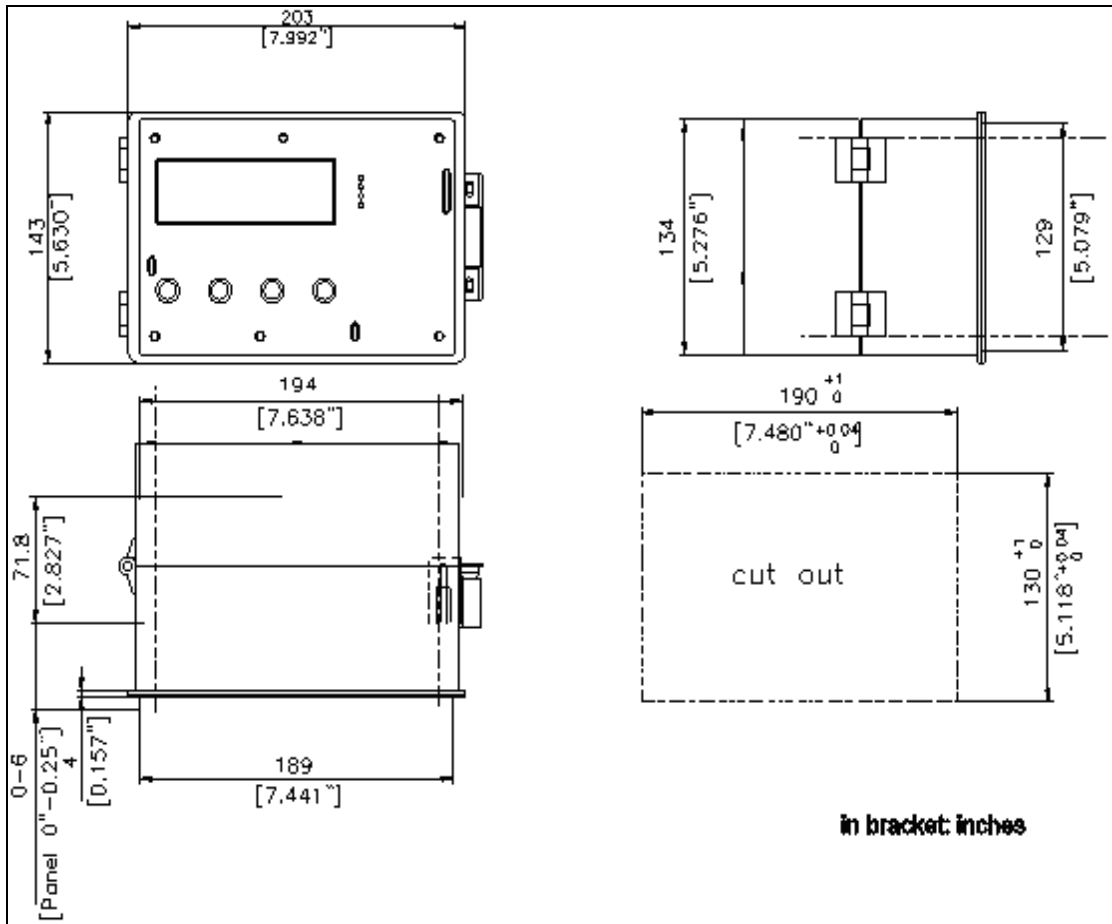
Housing for panel mounting BKS601B.S.590121
